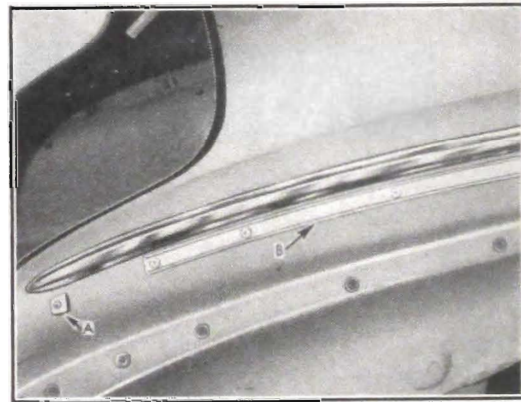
Rear Quarter Belt Molding and Retainer
